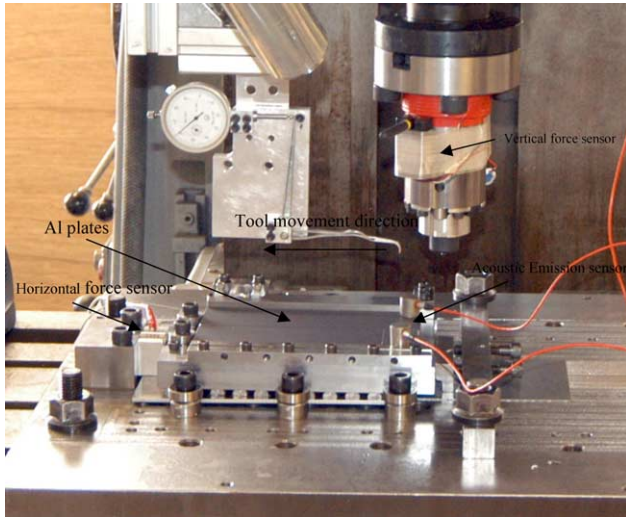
Fixture for FSW with horizontal and vertical load measuring sensors.
